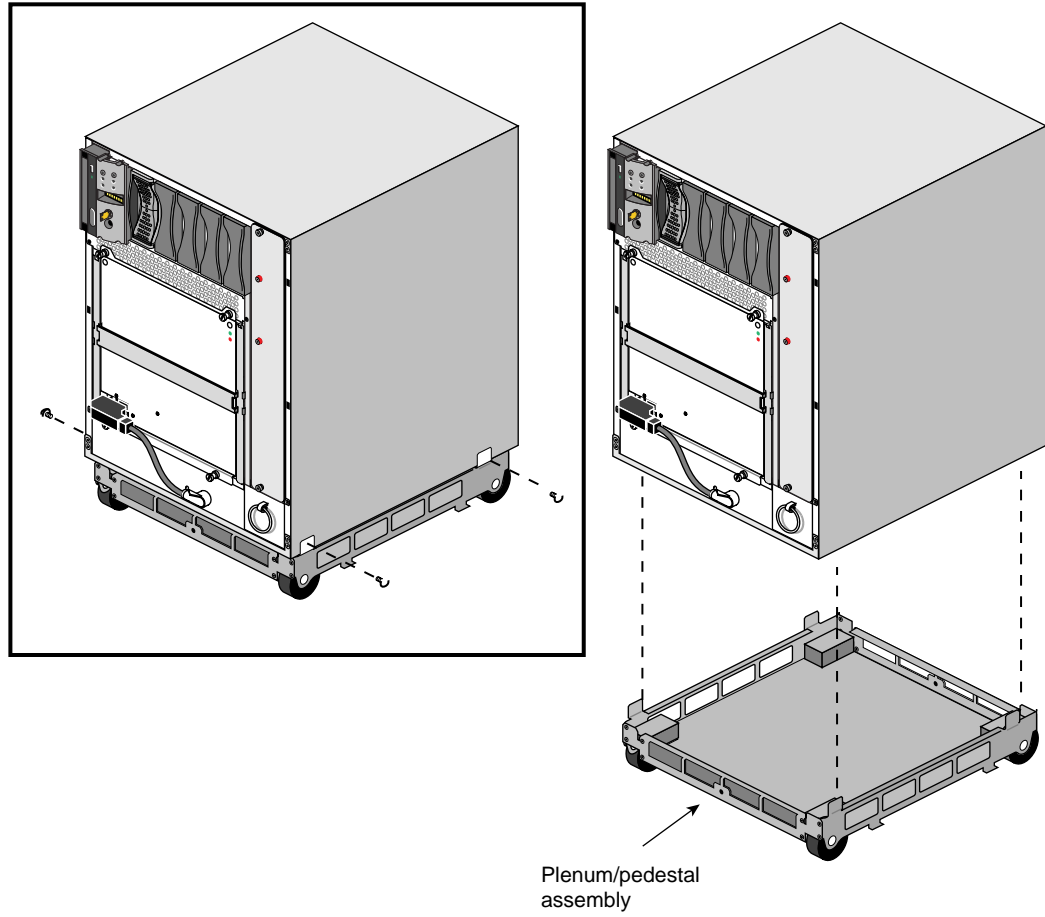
Removing the Bottom Plenum and Pedestal Assembly
